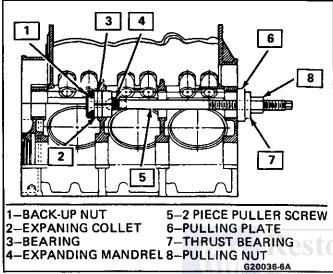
Removing/Installing Camshaft Bearings (Typical)
